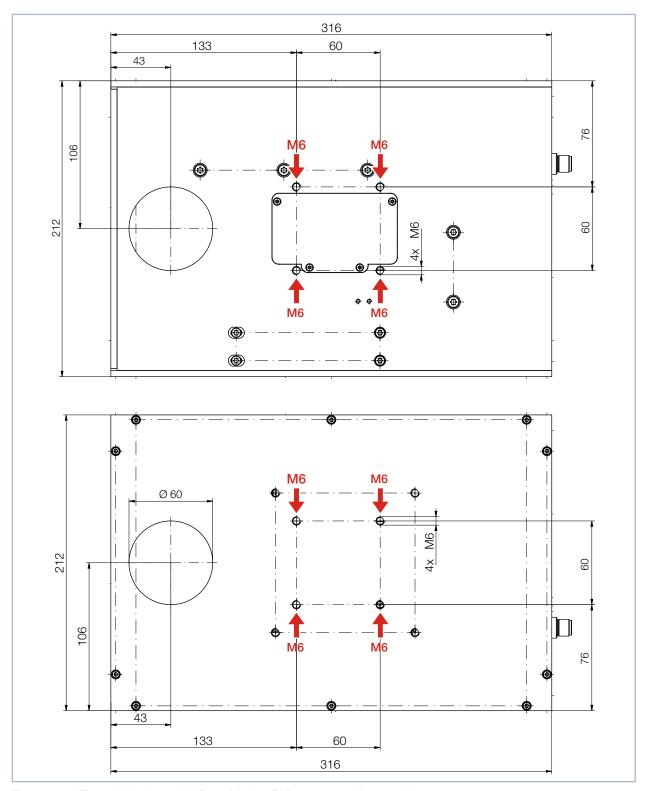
Threaded holes on the BeamMonitor BM+ 60 top and bottom view
